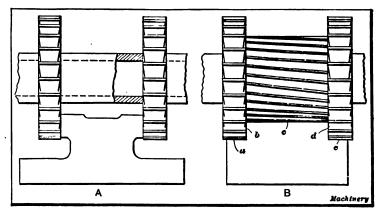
(A) Straddle Milling. (B) Gang Milling
